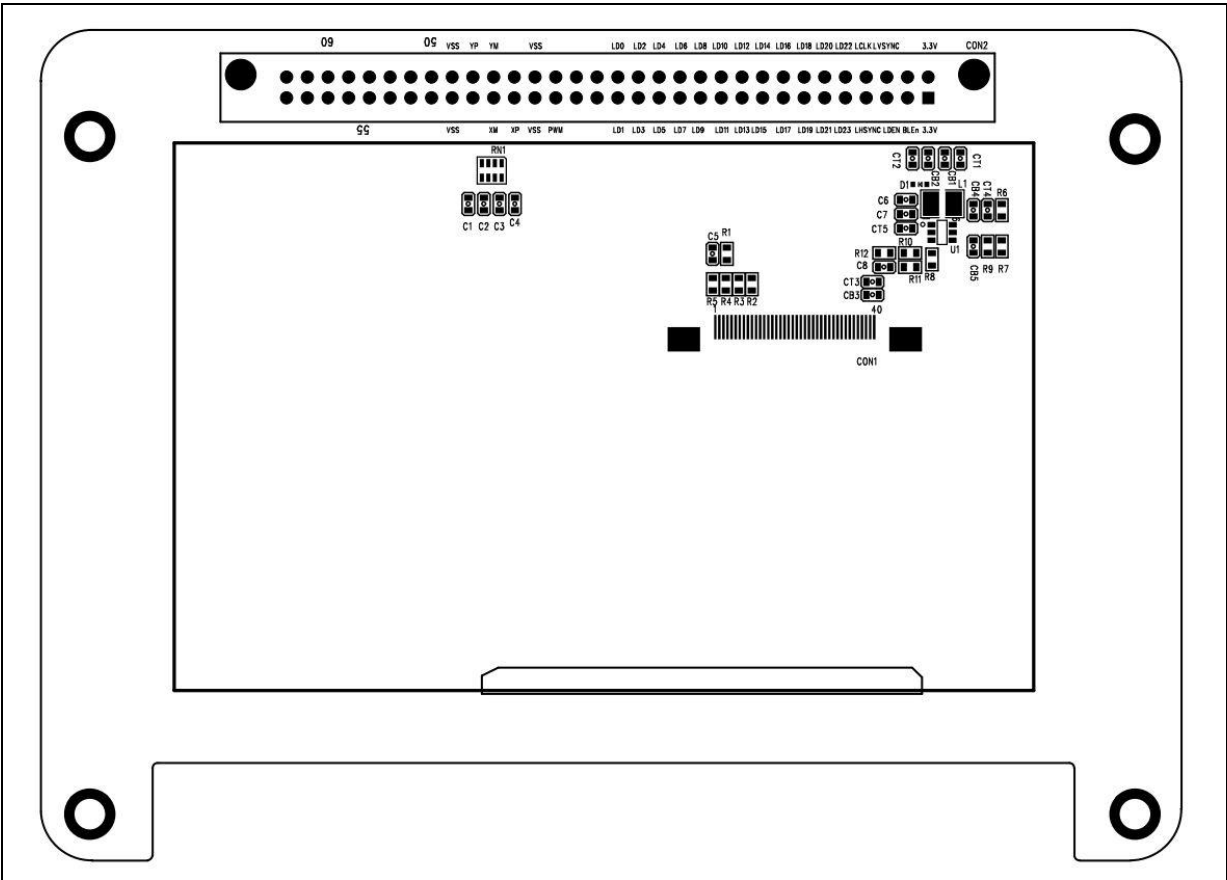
NuMaker-TFT_LCD4.3 PCB Placement (Back)
